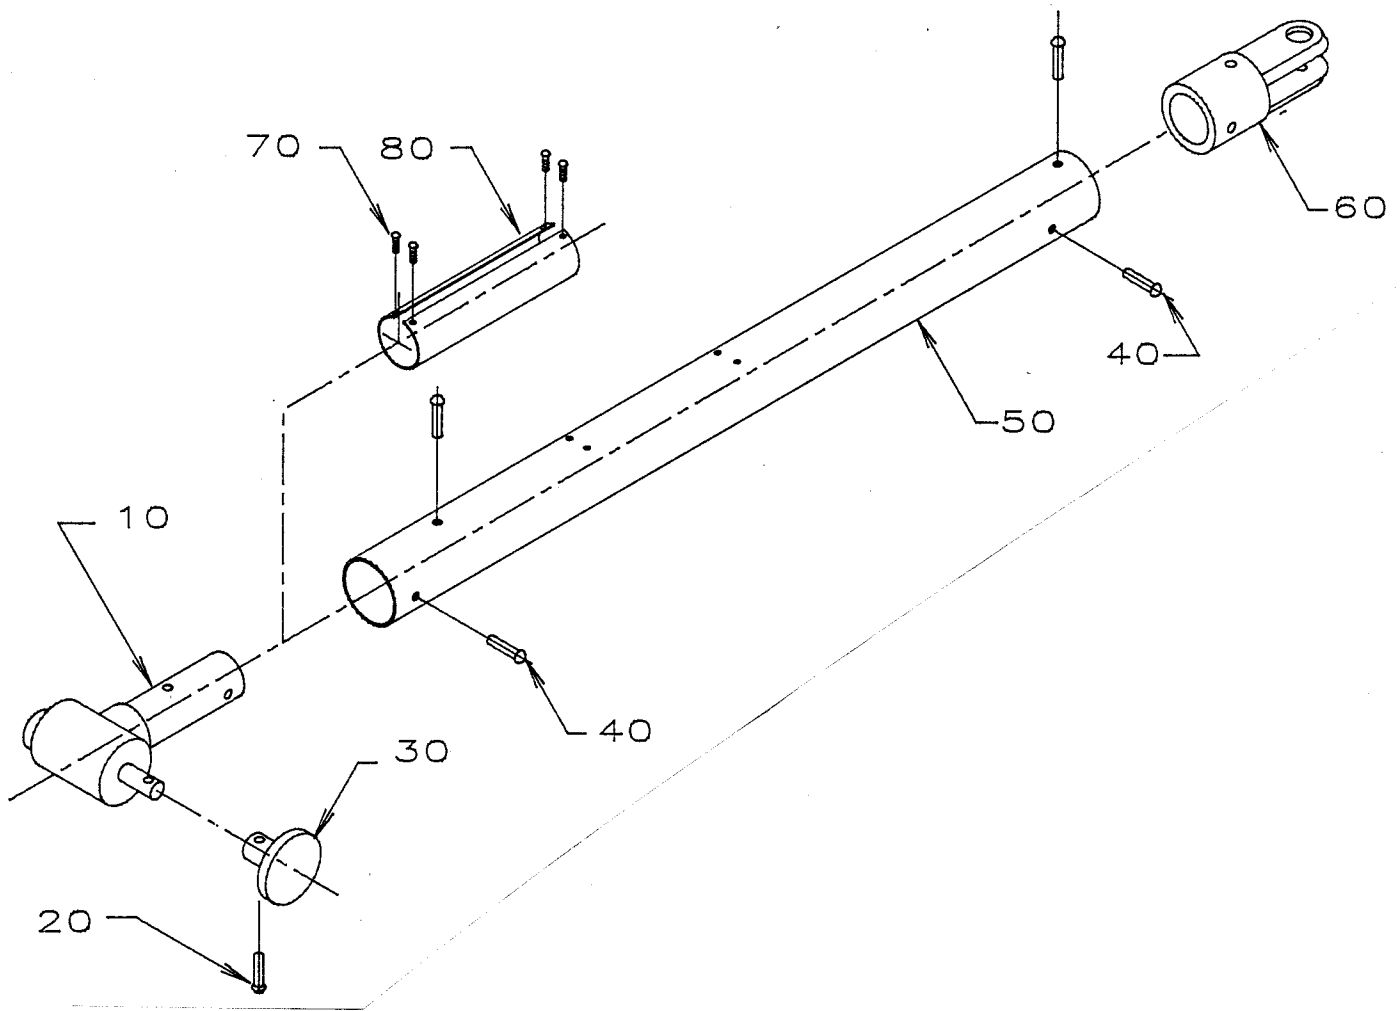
TYPICAL A2711 STRUT ASSEMBLY
